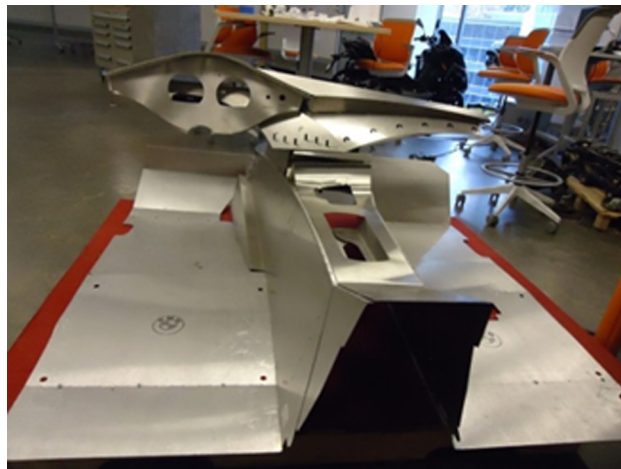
An example of floor panel of aluminum sheet produced with OSM technique, shown part was folded manually from a single flat pattern with minimal tooling [12,13]
